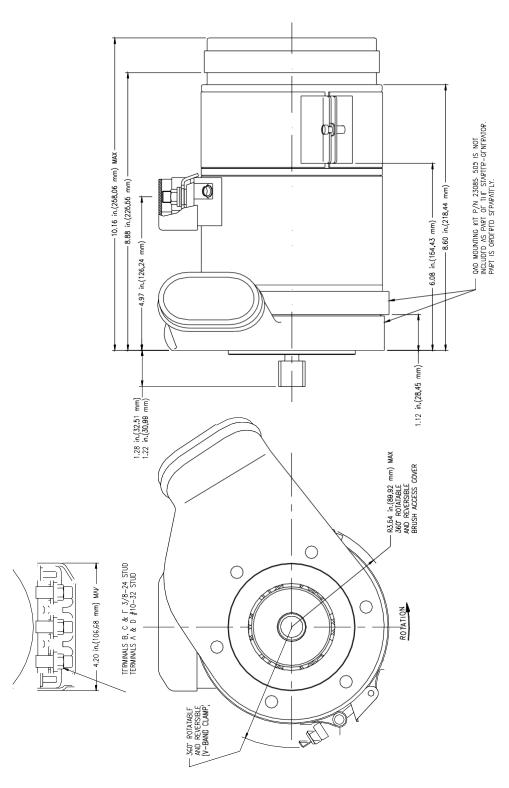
Outline Drawing of 23069-015 (Sheet 2 of 2)
